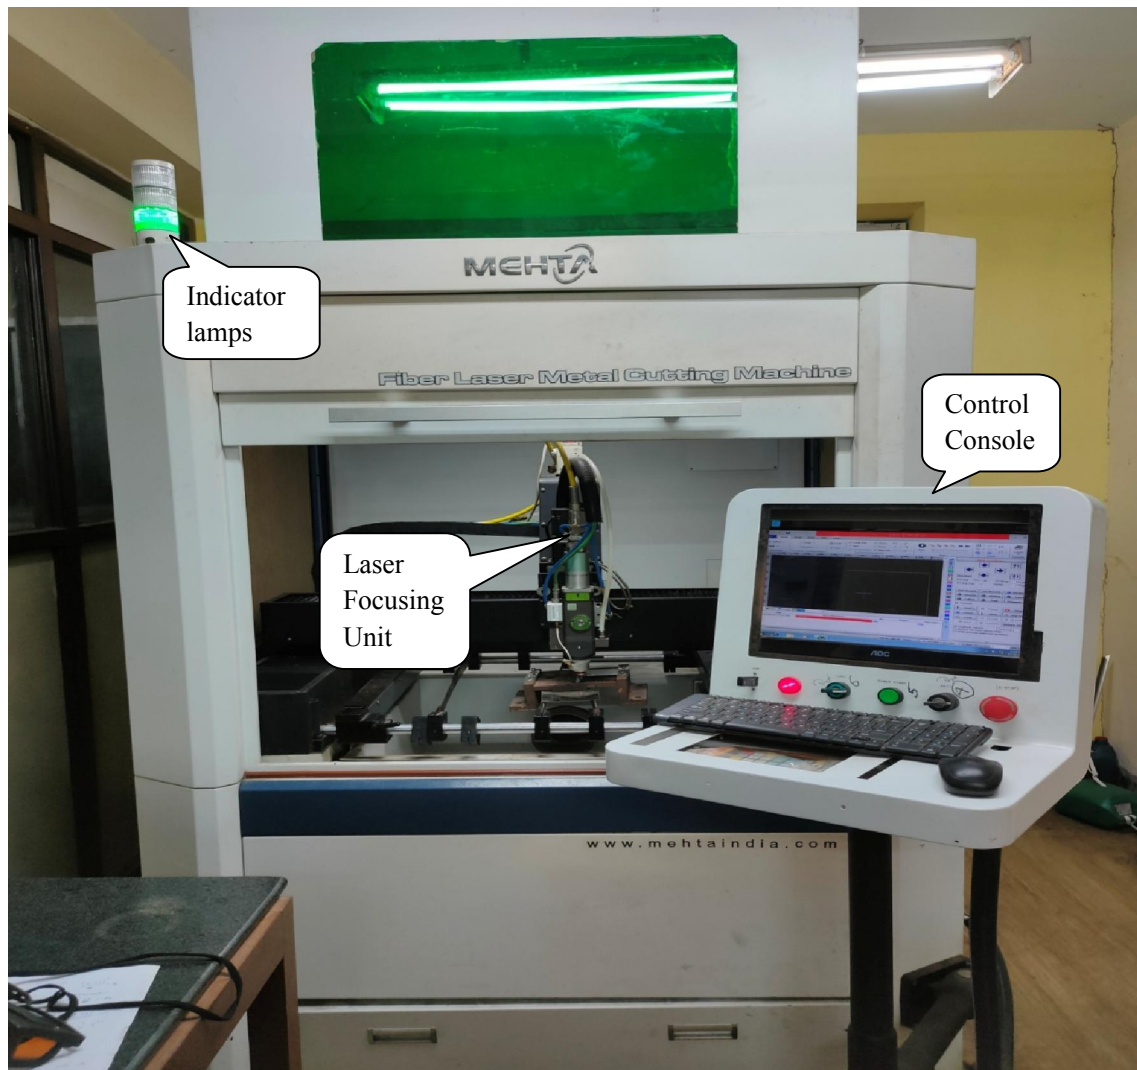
Photographic view of the QCW Fiber laser metal cutting machine workstation
